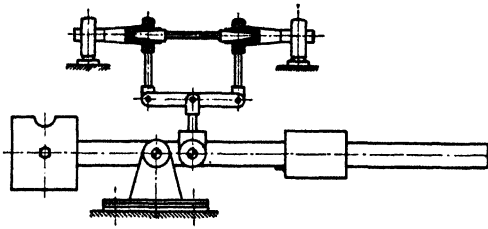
Arrangement of Wöhler rotating beam type fatigue testing machine.
